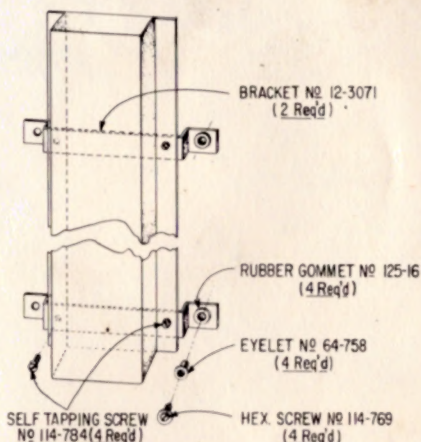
B — Exploded View, Reverberator Bracket and Unit Mounting on Models G2786, G2787 and H2786
